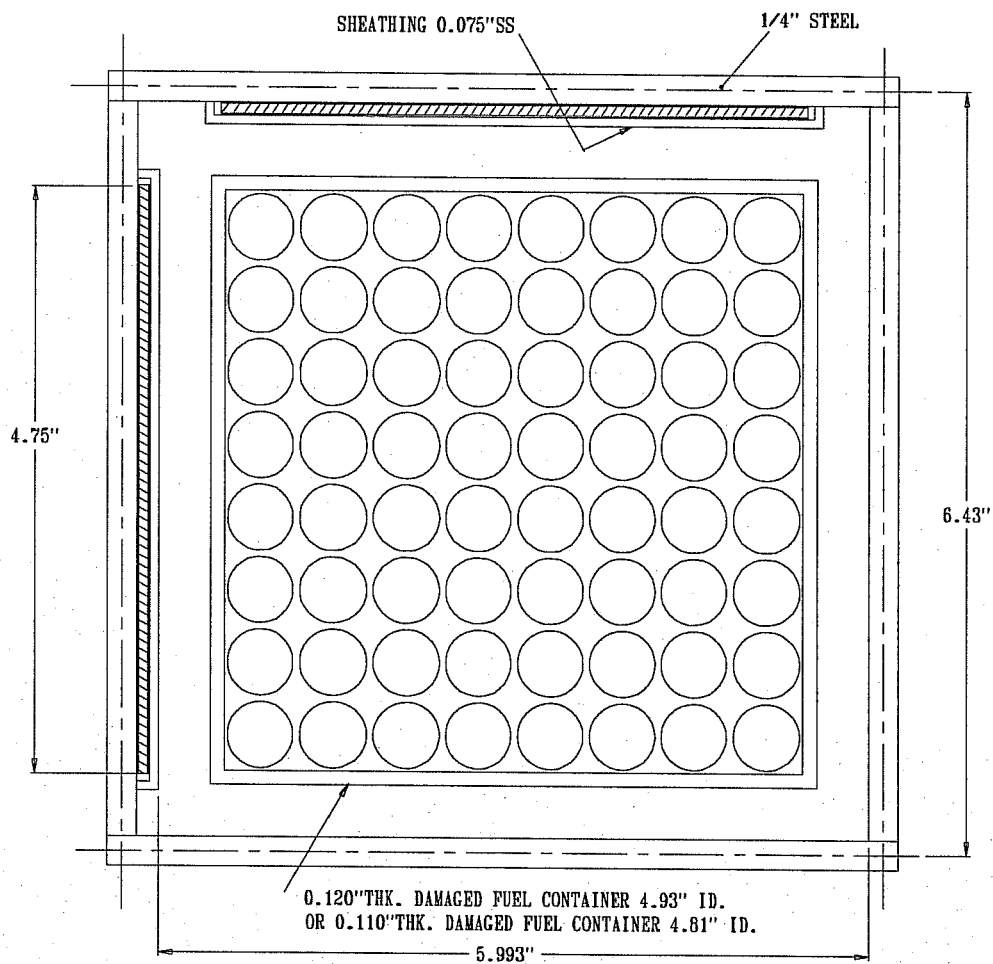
; FAILED FUEL CALCULATION MODEL (PLANAR CROSS-SECTION) WITH DAMAGED FUEL COLLAPSED INTO 8X8 ARRAY IN THE MPC-68 BASKET ( SEE CHAPTER 1 FOR TRUE BASKET DIMENSIONS )
